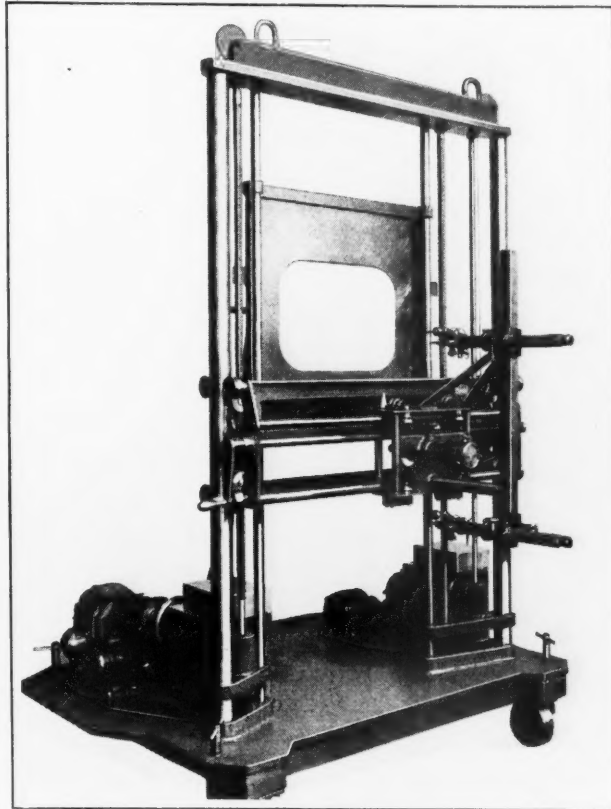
Acetylene Cutting Machine of Arc-welded Construction
